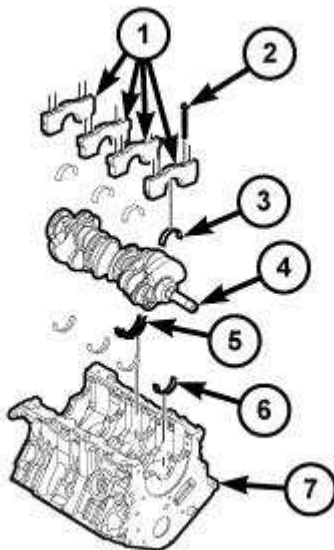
Main Bearing Caps, Bolts, Crankshaft & Engine Block
